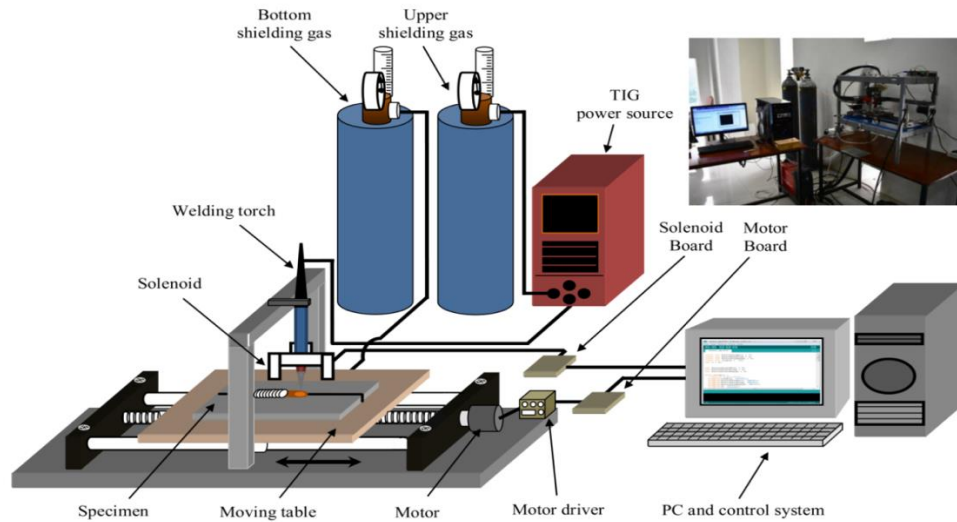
Schematic of EMF-TIG welding apparatus [18]
